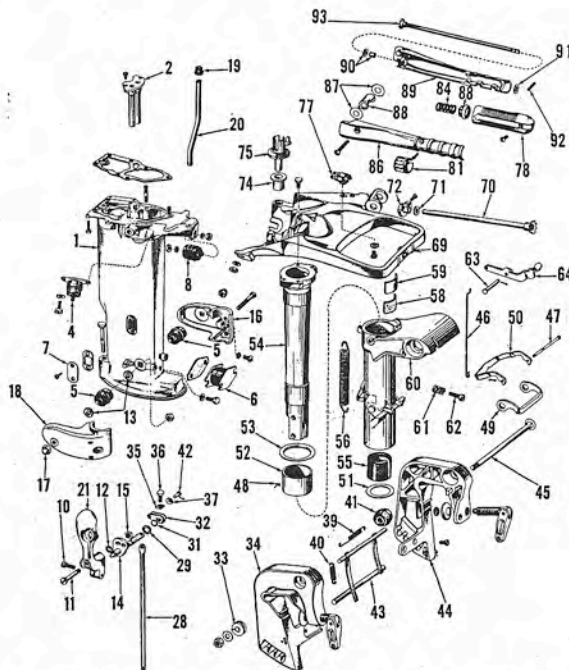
Exploded view of early series QD stern bracket and drive shaft housing assembly. Early FD motors are similar. Refer to Fig. J29 for legend except for the following.
